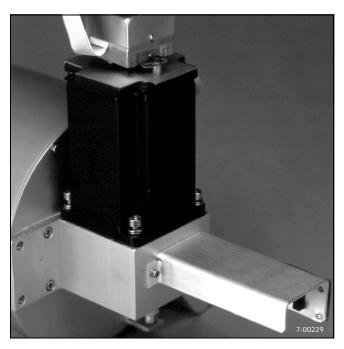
Gear mesh procedure: Fasteners installed but not locked
